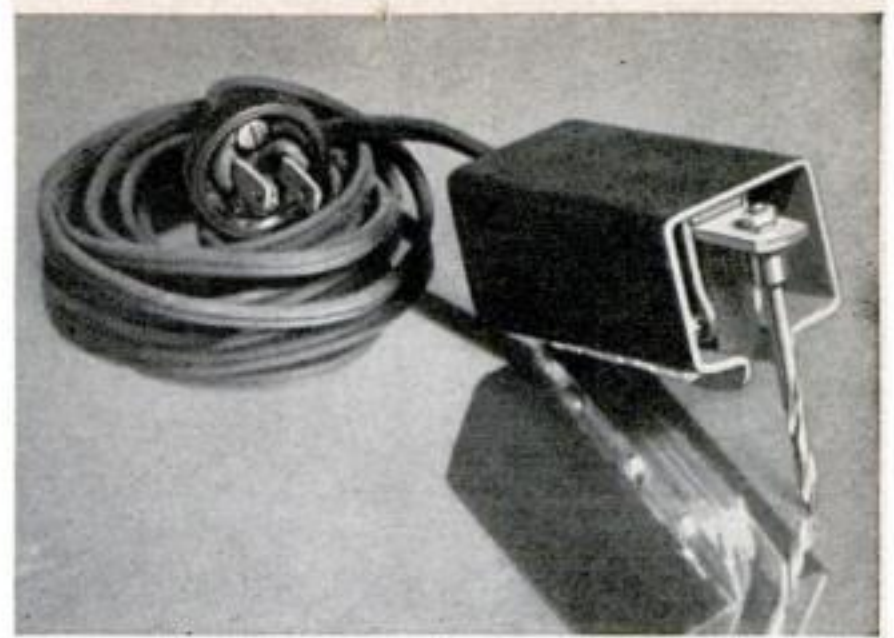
The finished engraving tool. To use it, hold as shown in one of the previous photographs
